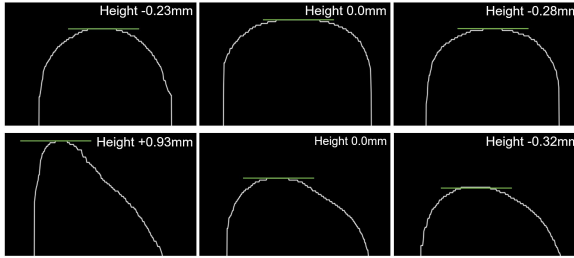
Welding results of hairpins. (a) no weld, (b) good weld, (c) pin not in the focus of the laser, (d) weld with too low power, (e) misaligned pin pair, (f) insulated copper rods.
